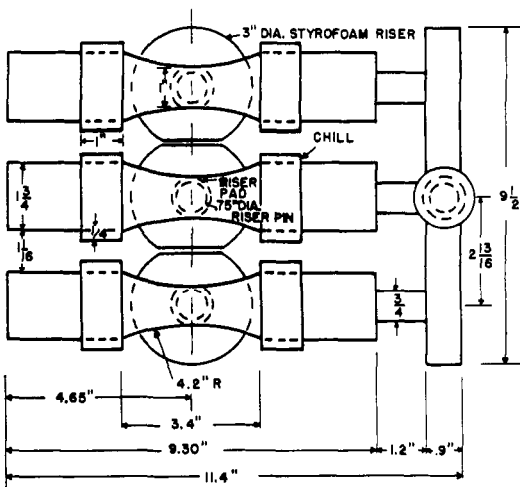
Illustrates Cavities in Bending and Torsion Fatigue Specimens.
